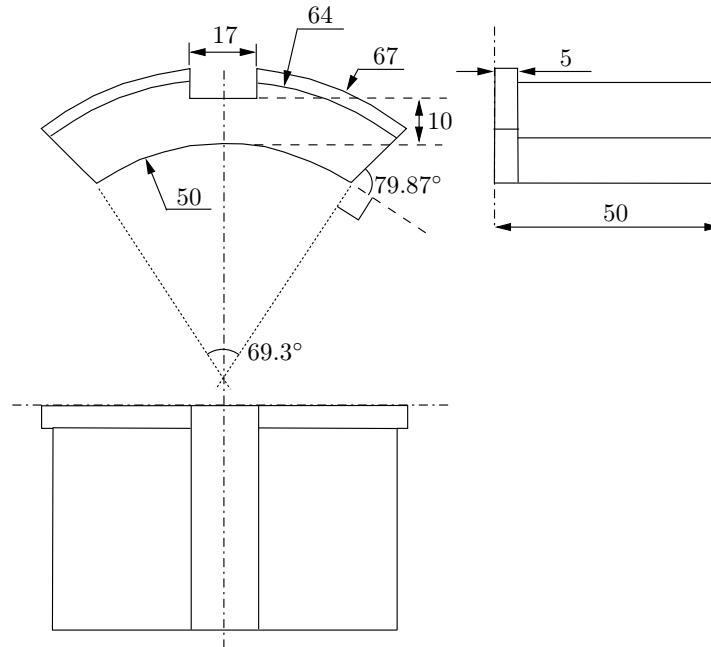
Detailed sketch of a pad with indication of dimensions in mm. The pad is for a passive bearing with no orifices. Note that only half of the pad is sketched due to symmetry.
